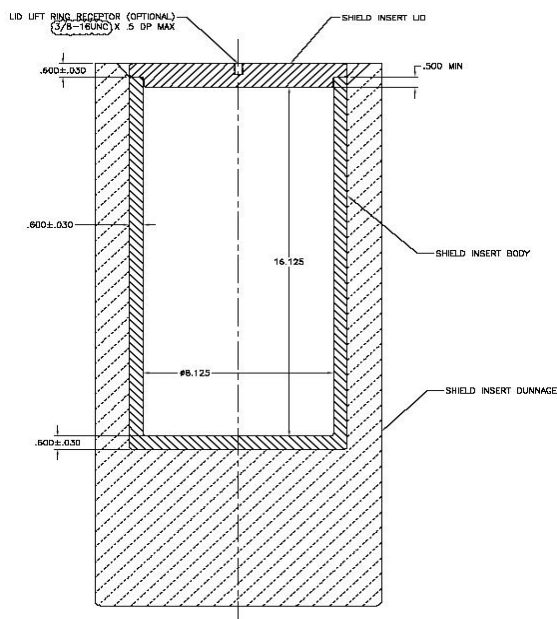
Shielded 12-inch Pipe Component Overpack Assembly
